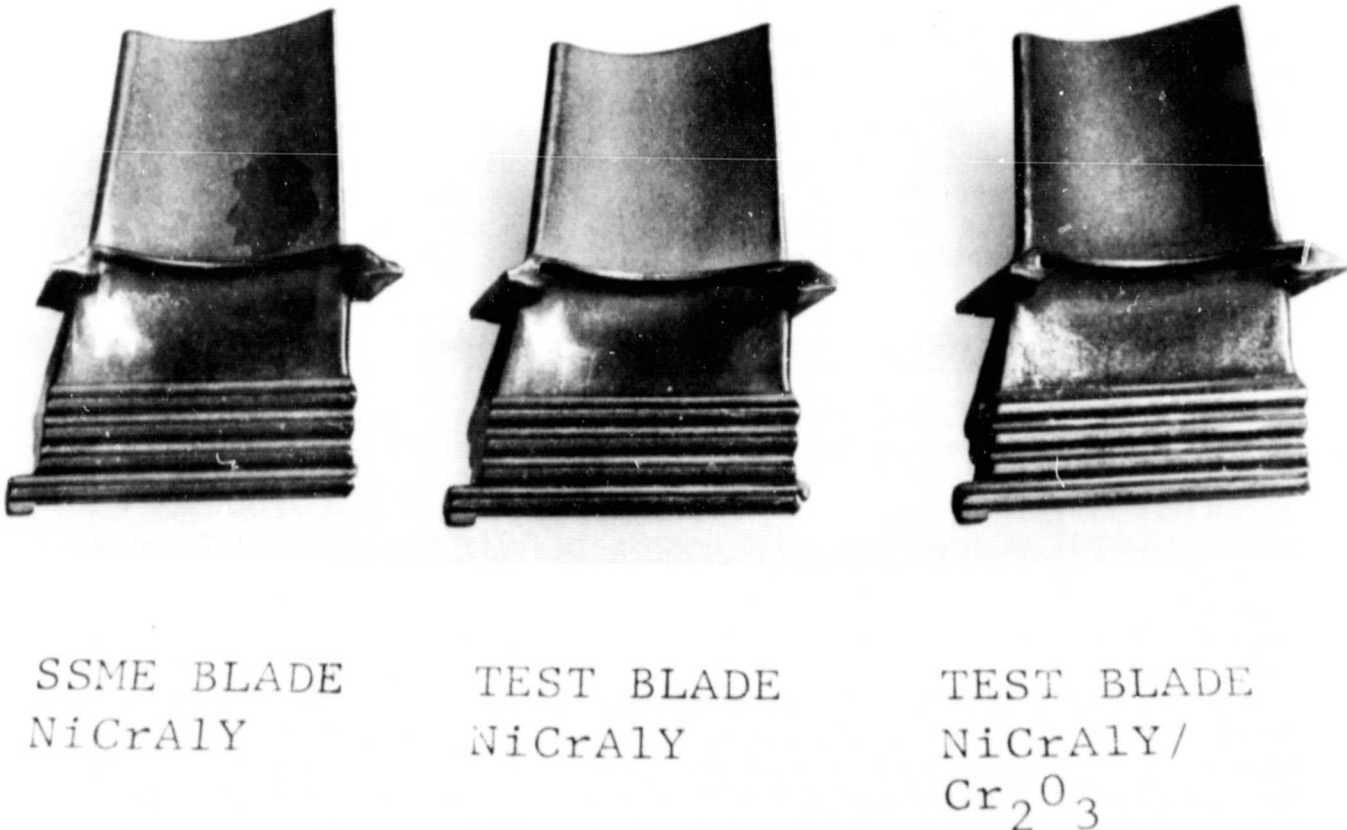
Turbine Blades after 25 Burner Rig Cycles.
